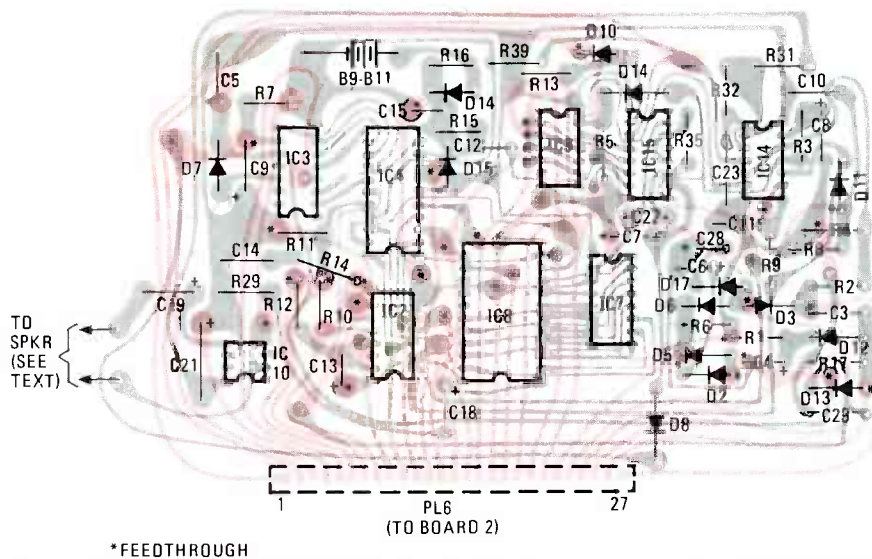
PARTS-PLACEMENT DIAGRAM for Board 1. Note that female header, PL6, mounts on the foil side of the board.
